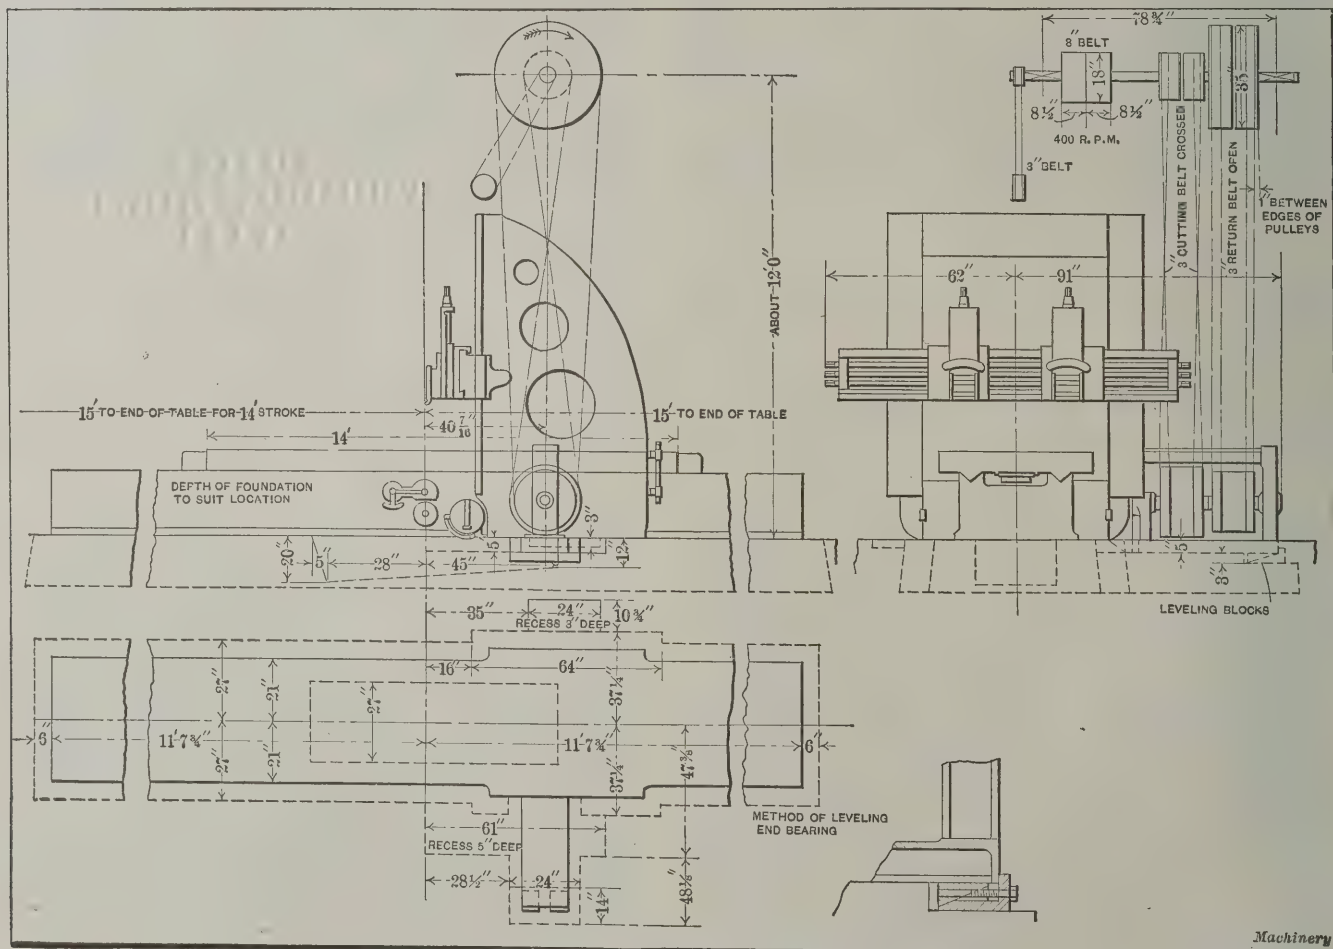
Foundation Plan for a 62-inch by 62-inch by 14-foot Planer
